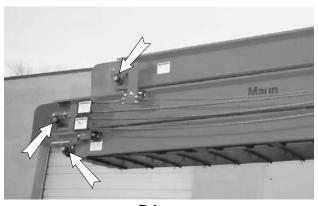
CONVEYOR SHAFTS - LEFT SIDE
